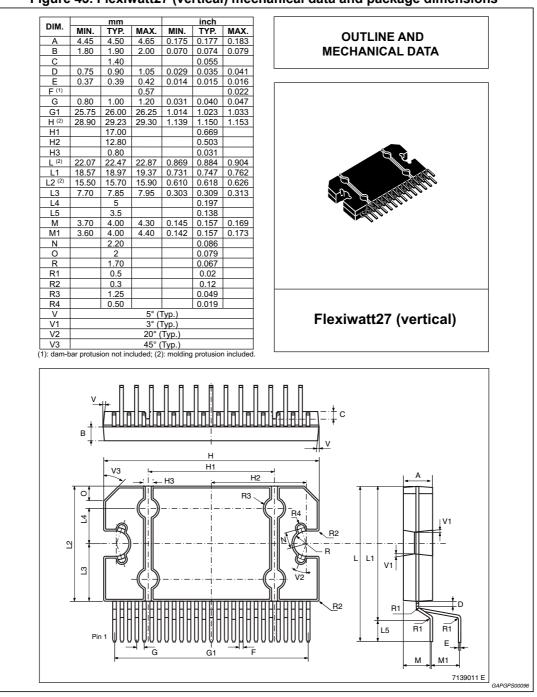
Flexiwatt27 (vertical) mechanical data and package dimensions
